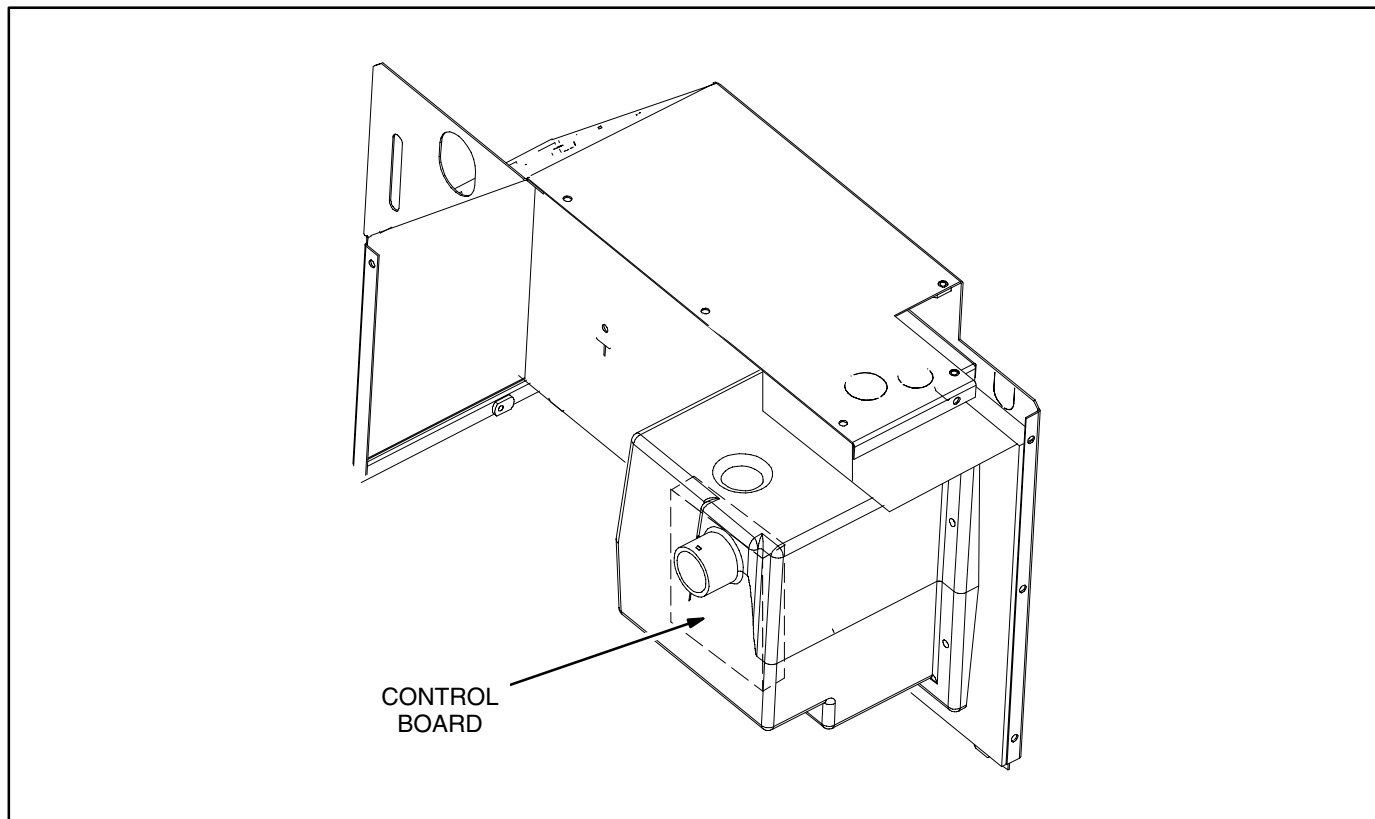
CONTROL BOARD (PRIOR TO SPEC C)
